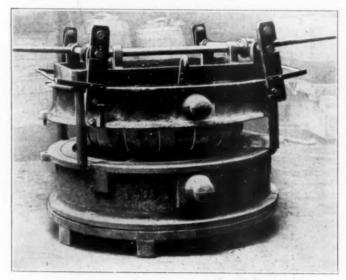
THE OSBORN PORTABLE PATTERN-DRAWING MACHINE -SHOWING THE PATTERN DRAWN
